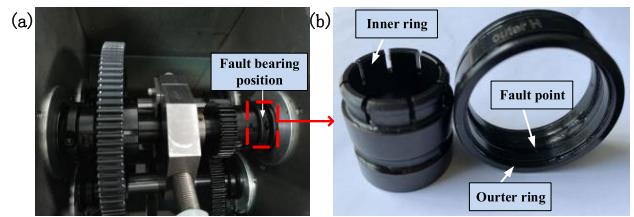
(a) Physical drawing of gearbox, and (b) fault bearing.
